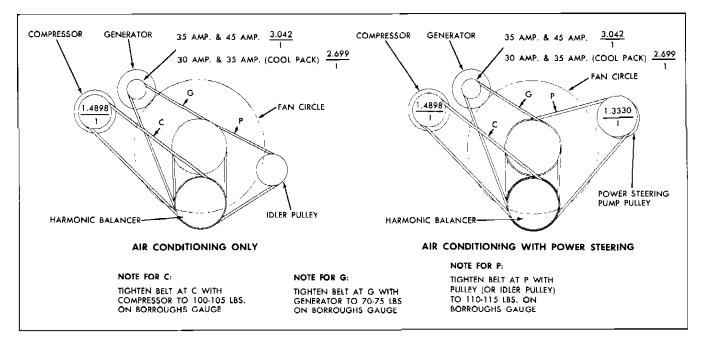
Pontiac Engine Drive Belt Combinations
